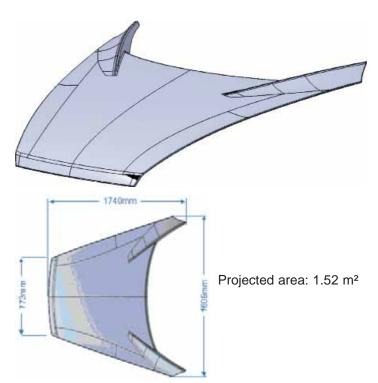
General layout and dimensions of the QarmaQ hood outer skin
